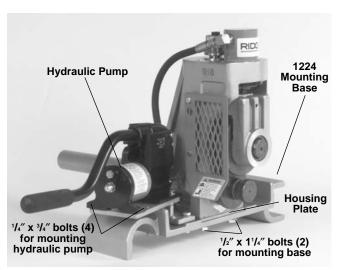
918 Heavy Duty Roll Groover on 1224 Threading Machine Mounting Base
